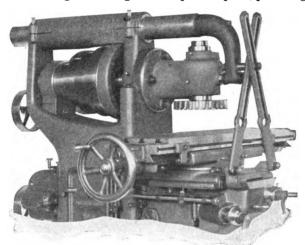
, FACE MILL ON VERTICAL SPINDLE ATTACHMENT.
